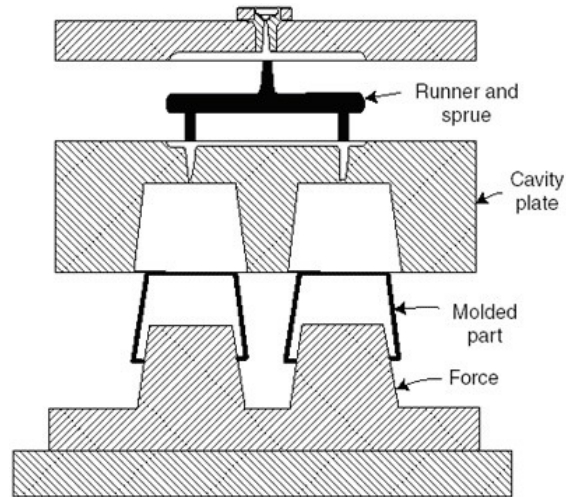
Two cavity mould (Injection Mold Tech Basics, 2006)
